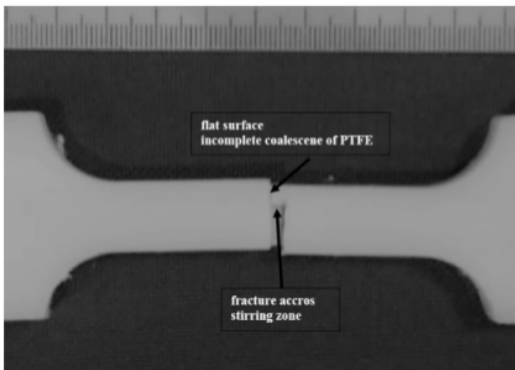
Photomicrograph of fracture surface of PTFE at welding speed 30 mm/minute and tool rotation 750 rpm
